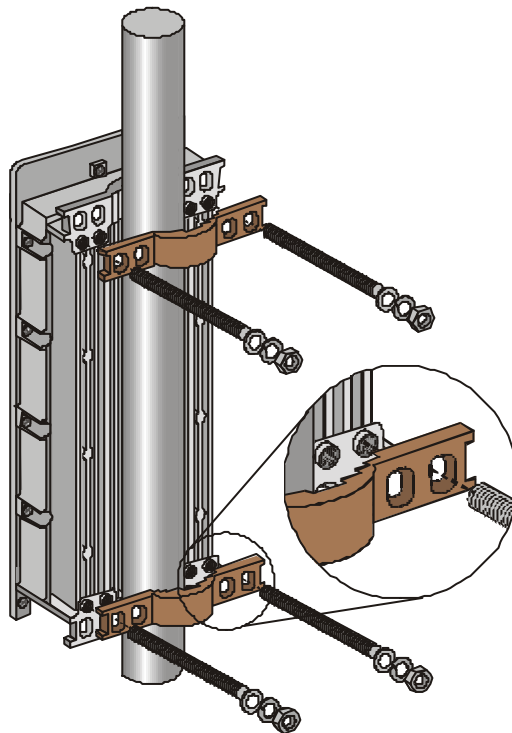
3" Pole Mounting Installation Using the Supplied Brackets
